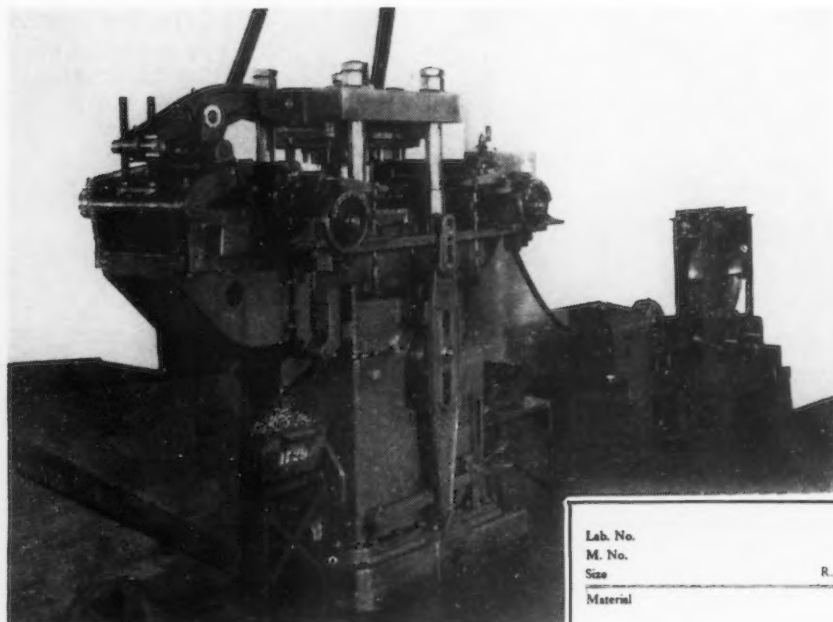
Dieing machine (50 ton) and stock feeding mechanism for caliber .30 metallic belt link.
